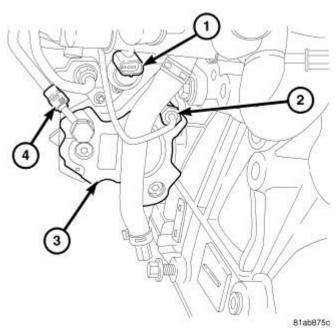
Coolant Tube & Bolts Courtesy of CHRYSLER LLC
